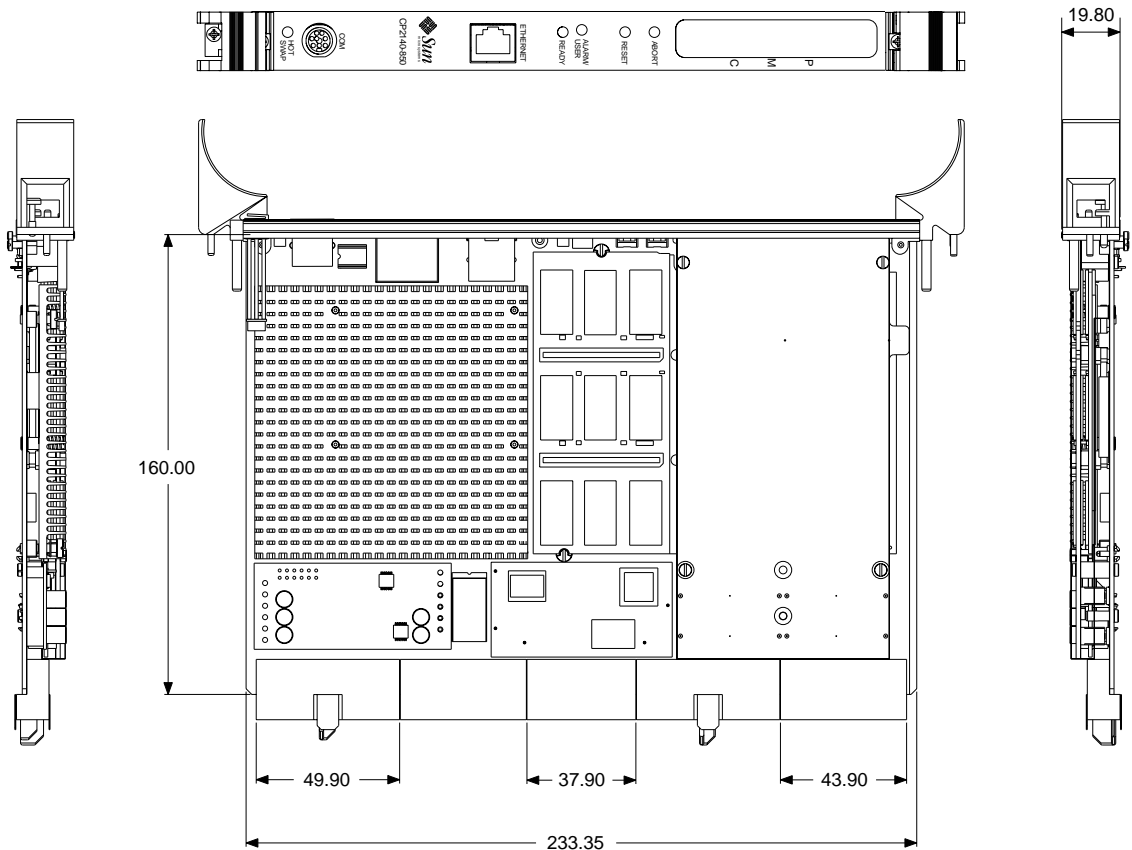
Mechanical Dimensions of the Netra CP2140 Board
